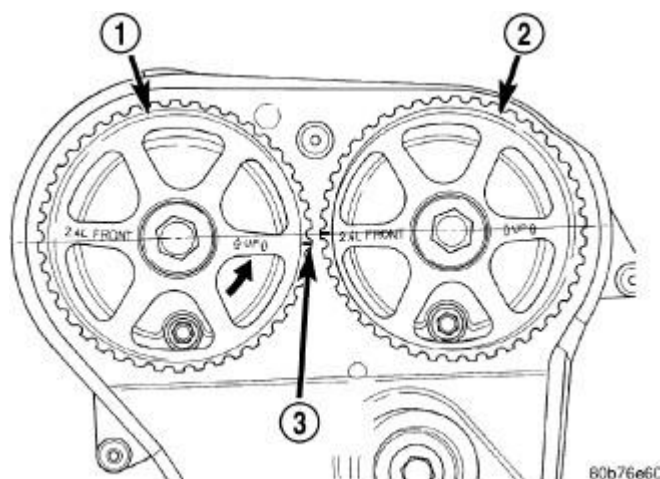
Camshaft Sprocket Alignment For Timing Belt Installation
